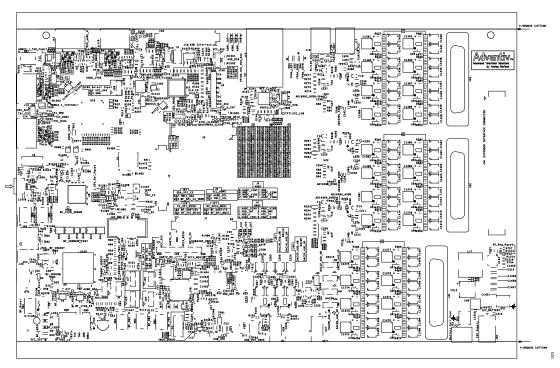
EVAL-MELODY-9 Printed Circuit Board (PCB) Assembly Drawing (Top Side)
